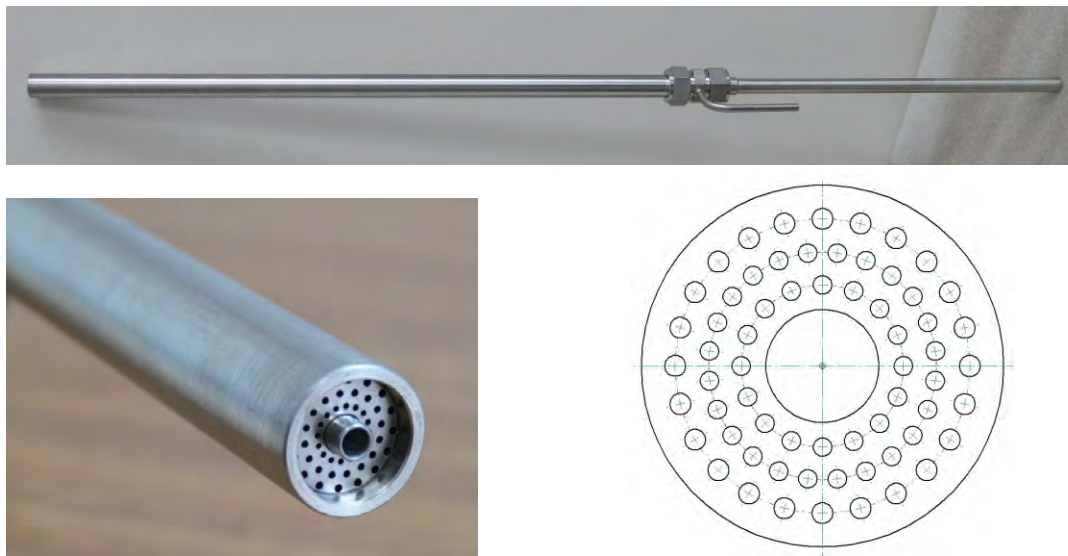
Photographs of the complete ethylene burner assembly (top) and burner face (left). The pilot plate design with three concentric rows of pilot flames that provide uniform heating is shown to the right.
